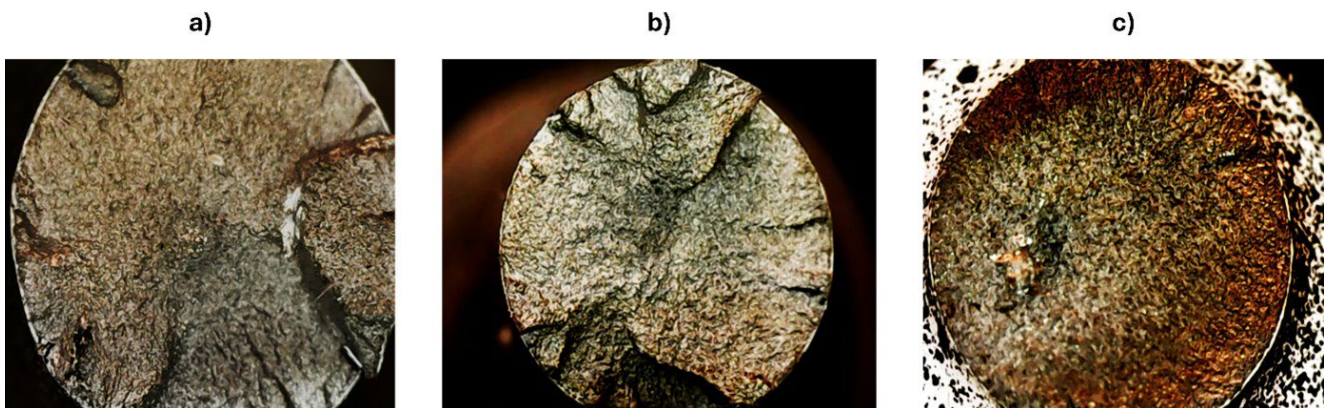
Macroscopic analysis of fracture surface for: a) hourglass-shaped specimen, b) straight-sided (parallel) specimen, and c) notched specimen.
